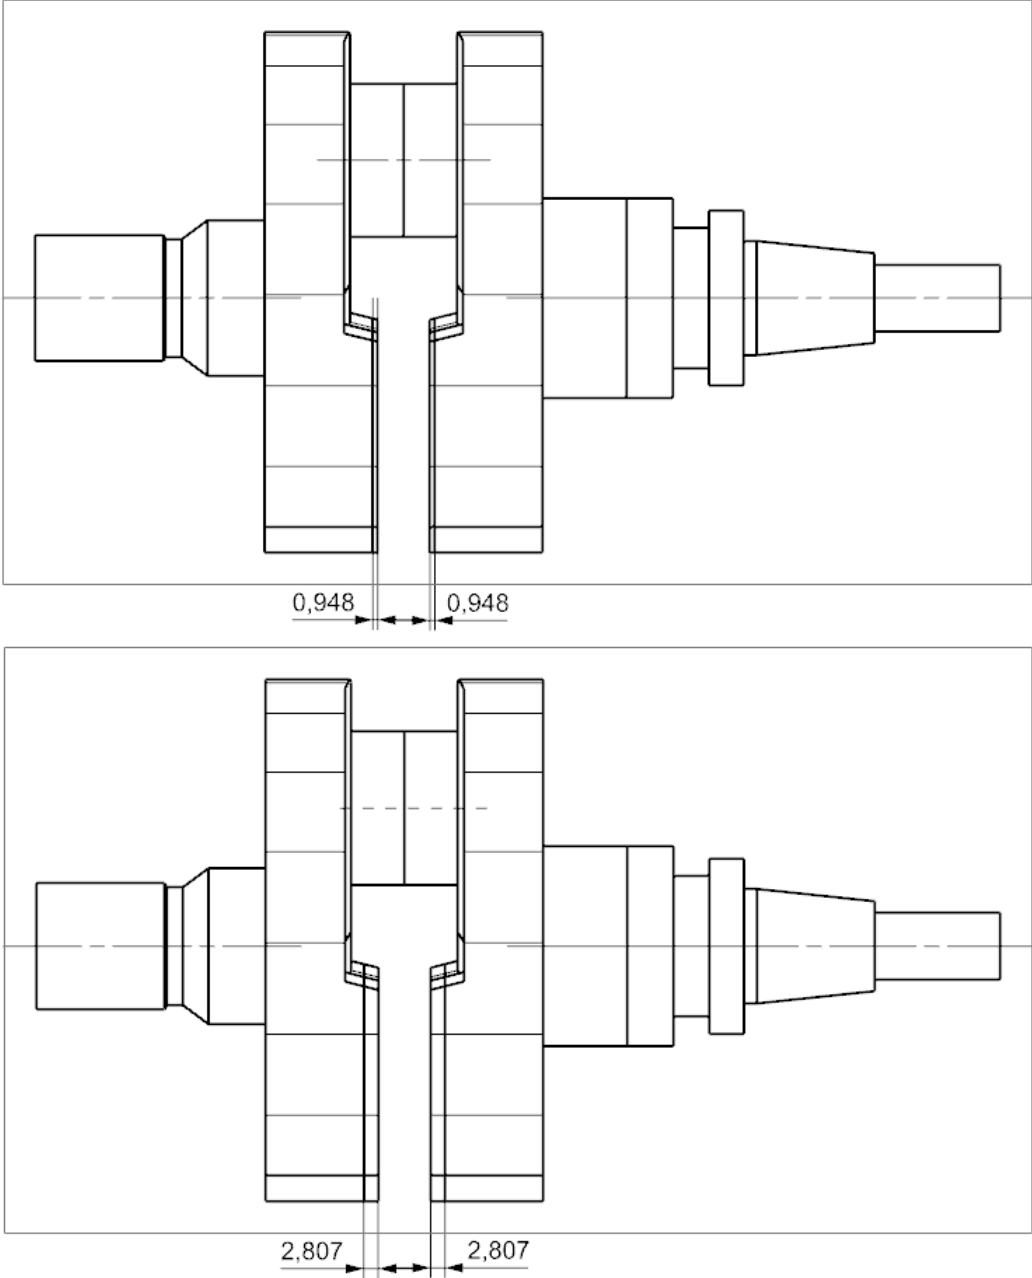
The balanced crankshafts with the amount of mass removed in terms of mm. Top: balanced to 63.75%. Bottom: balanced to 28%.
